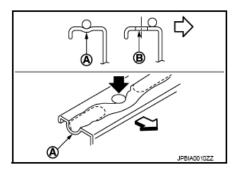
Locating Bolt Holes Courtesy of NISSAN MOTOR CO., U.S.A.
